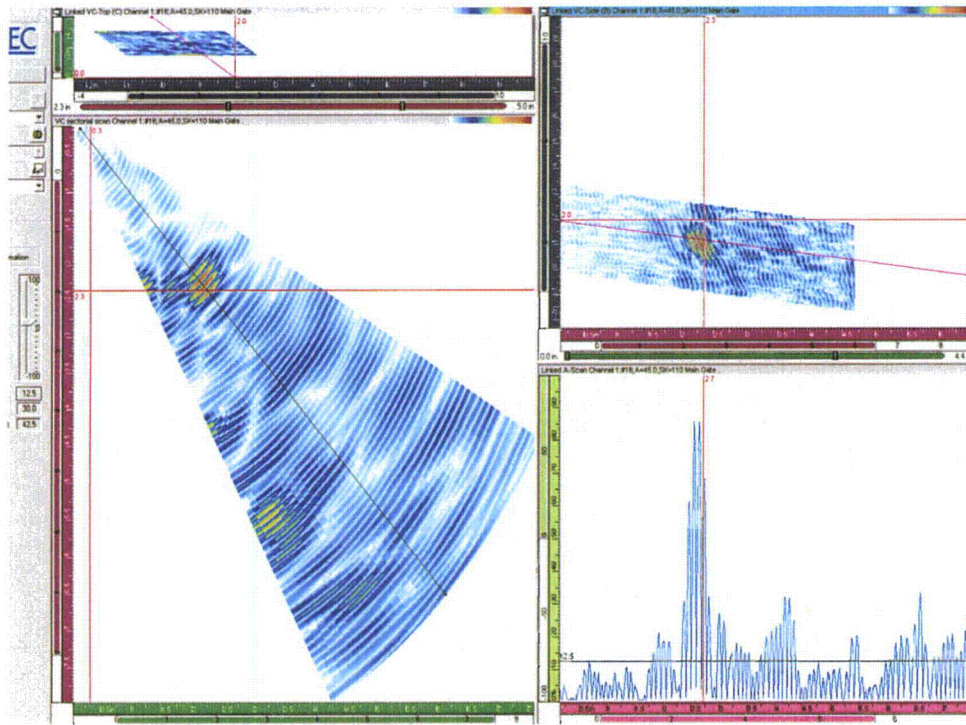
B501 as Inspected from the Equiaxed Side of the Weld, Showing a Yes Detected
